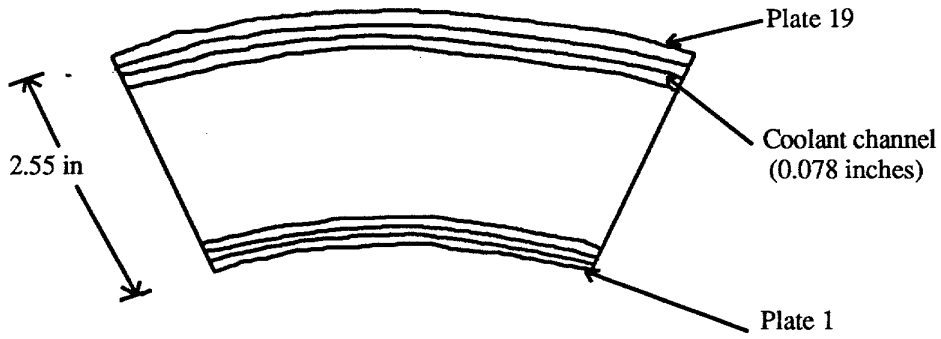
ATR fuel assembly (8 of 19 plates shown)
